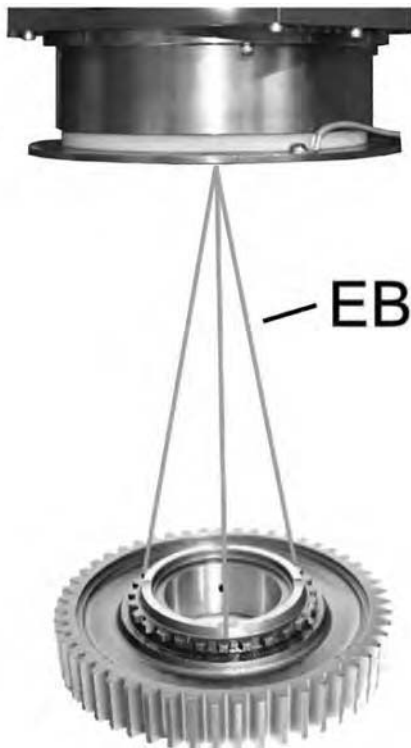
Gear welding with three electron beams (EBs). Courtesy of Sciaky, Inc.
